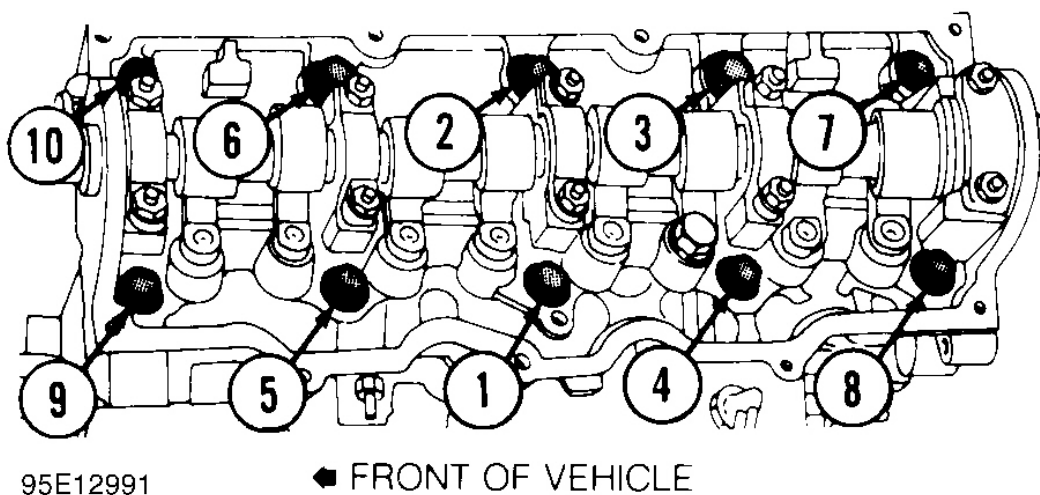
Typical Cylinder Head Tightening or Loosening Sequence
